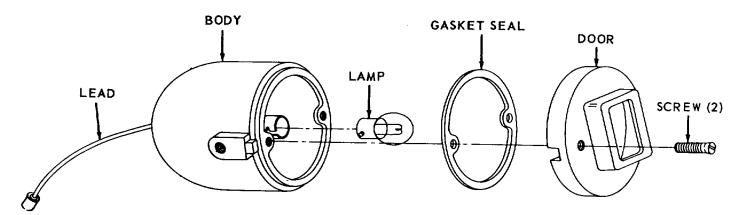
Blackout stoplight assembly, disassembly and reassembly, exploded view.
